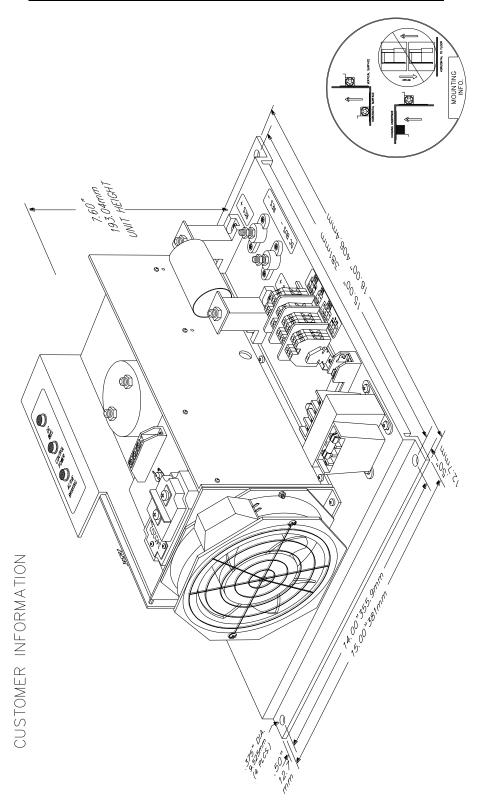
M3452 K3 Chassis Dimensional Outline Drawing
